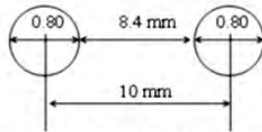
Dimensions [mm] of the holes drilled in the specimen
